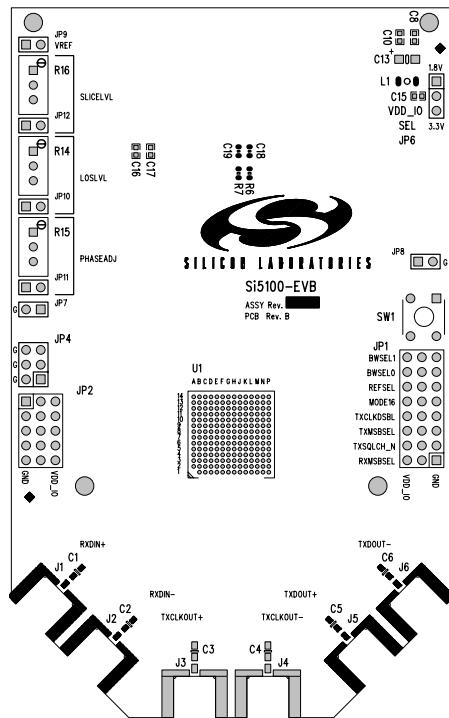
Si5100-EVB Component Side Assembly (Daughter Card)
